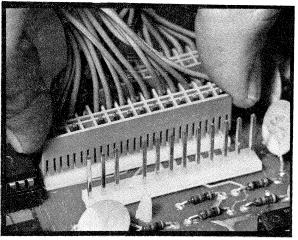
Connect Cable # 7 to J5 on the Playback Board.
